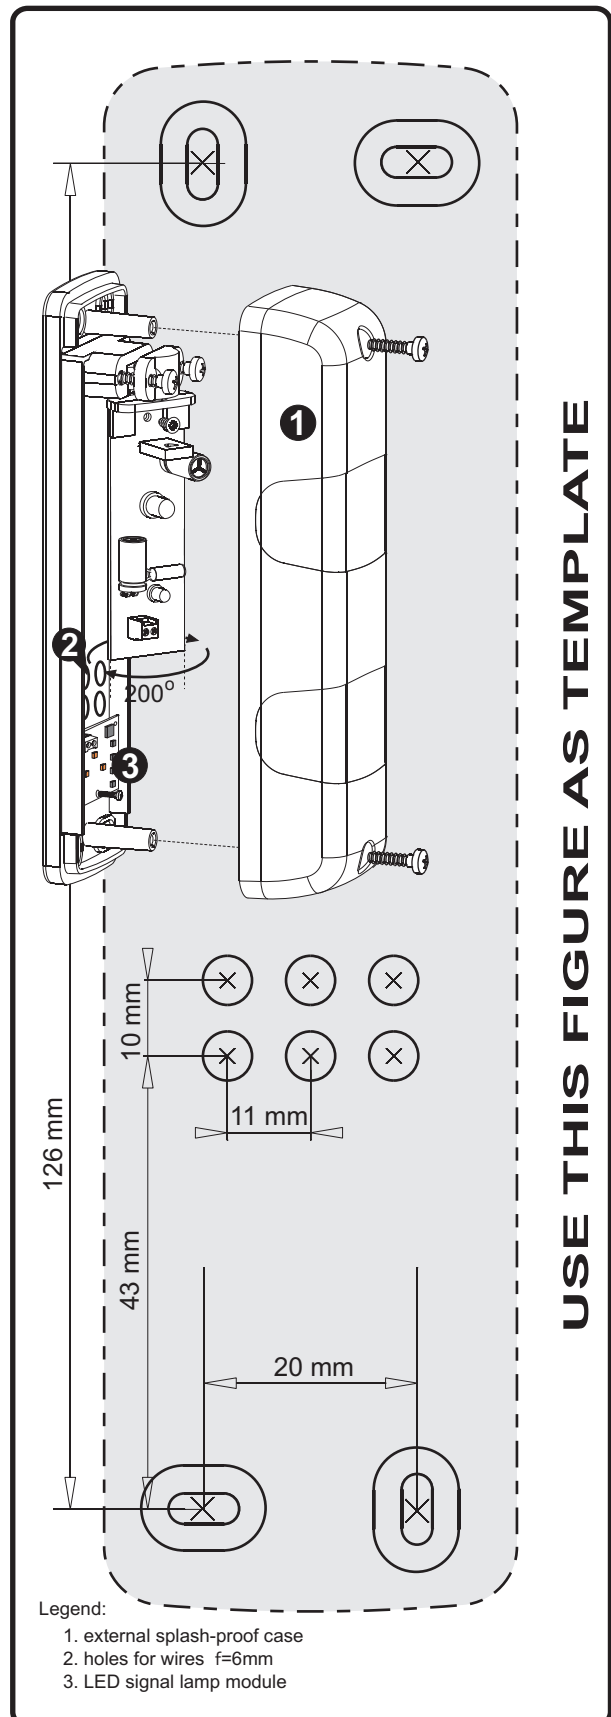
Holes spacing in the scale of 1:1 with the assembly drawing.
